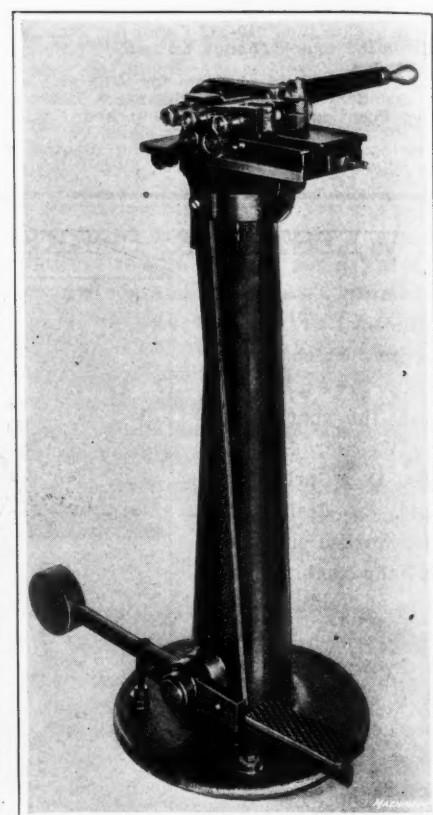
Graduating and Marking Machine built by Noble & Westbrook Mfg. Co.
